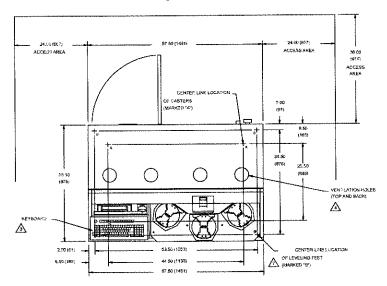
Handler/Control Marker Top View Dimensions Including Access Area
